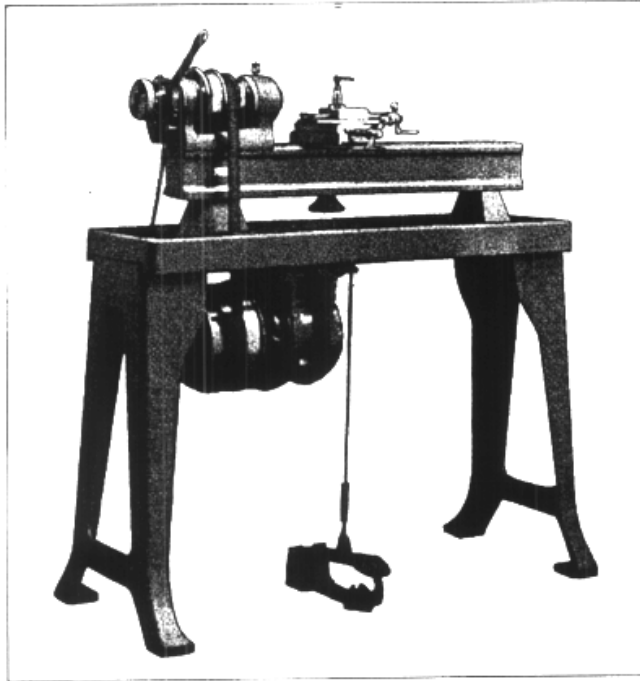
Rivett Series 505 ball-bearing, high-speed lathe on Oil Pan and Floor Legs with Direct Motor Drive (Patents Pending)
